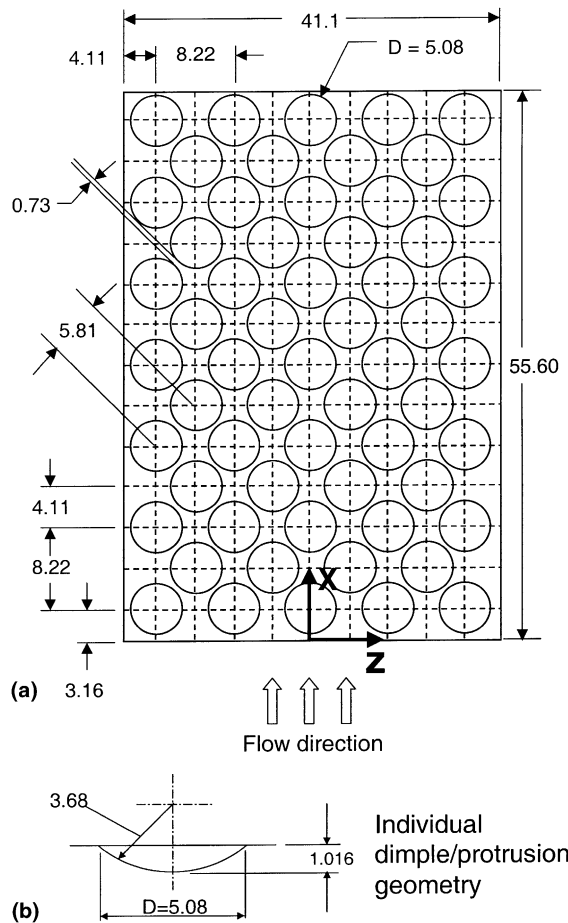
Test section surfaces: (a) overall dimple and protrusion test surface geometry, including coordinate system; (b) individual dimple/protrusion geometry. All dimensions given in centimeters.
